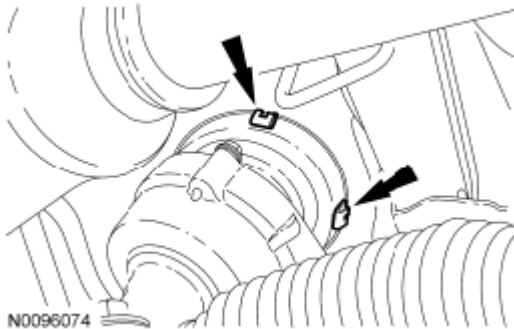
Locating Steering Gear-To-Dash Seal Retaining Clips
